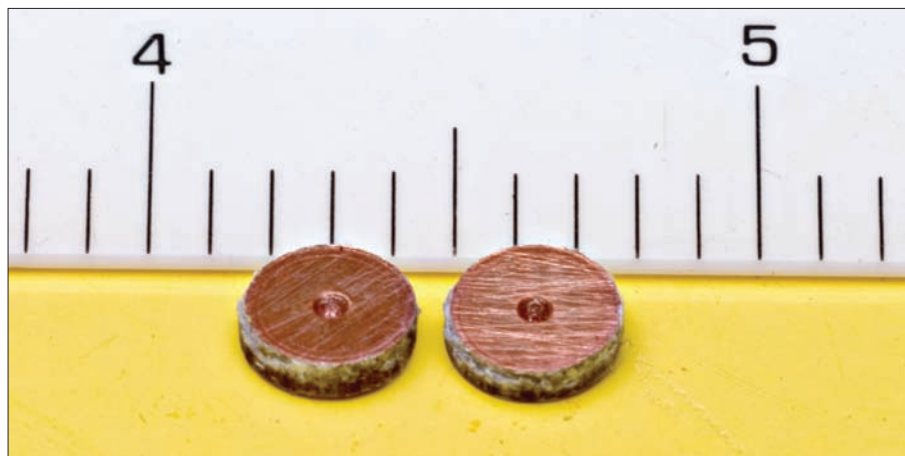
Examples of the resultant discs. In practice the can be either mounted on the copper side of p.c.b. material, or on the blank side (see text).
